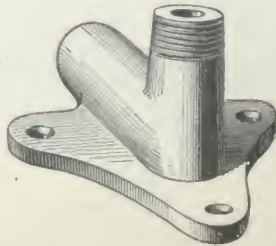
Illustrates side outlet as arranged for bracket lamp.
